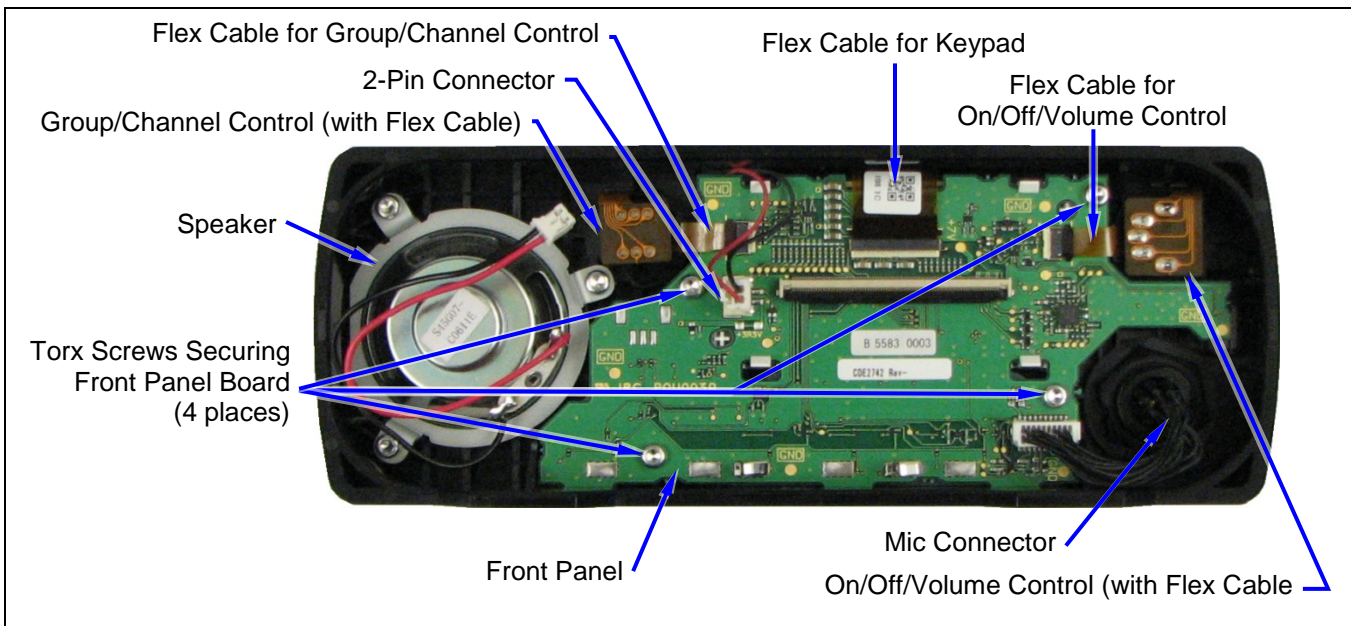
Removing the Front Panel Board and Display from the Front Panel
